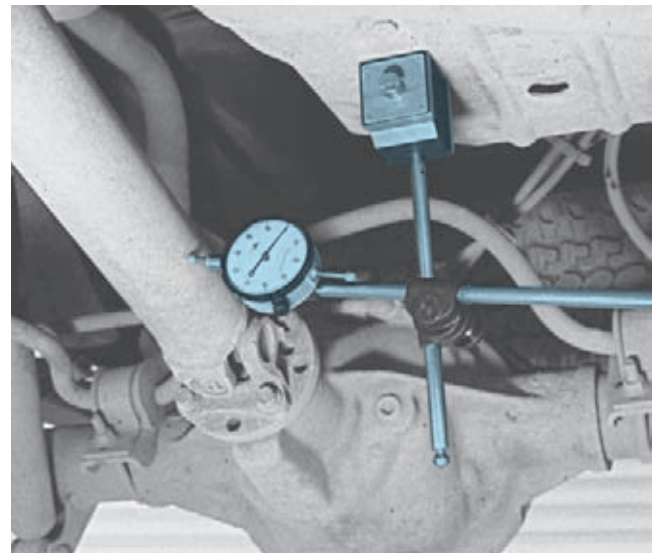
A magnetic-base dial indicator has been attached to the gas tank skid plate of this light truck with the indicator pointing directly toward the center of the driveshaft. When the driveshaft is rotated, any runout will be shown on the dial indicator.
